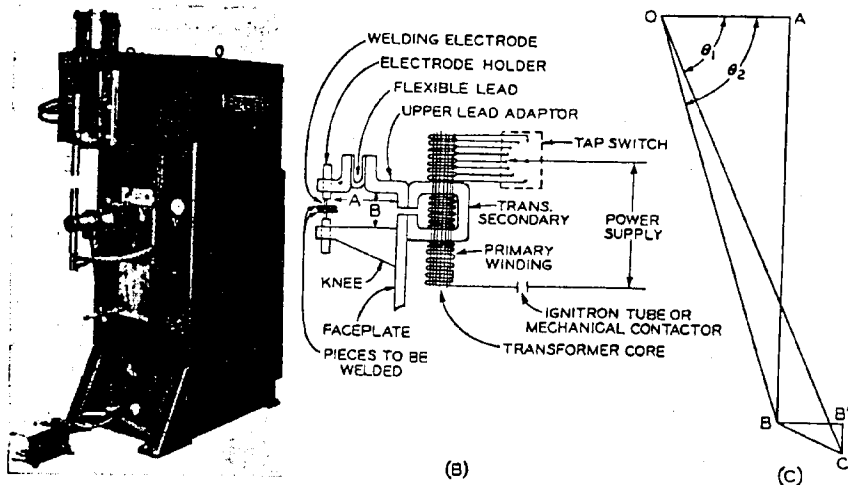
(A) Courtesy Precision Welder & Machine Company.
